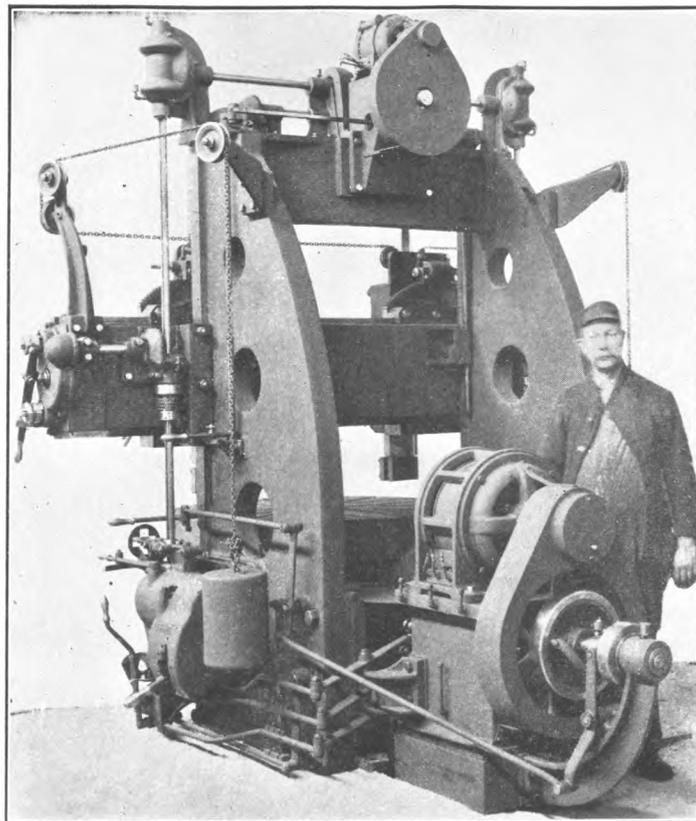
BORING MILL, WITH GUARDED GEARS.
